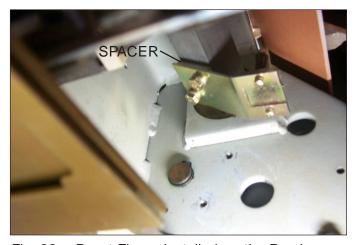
Reset Finger Installed on the Breaker Pole Shaft.
